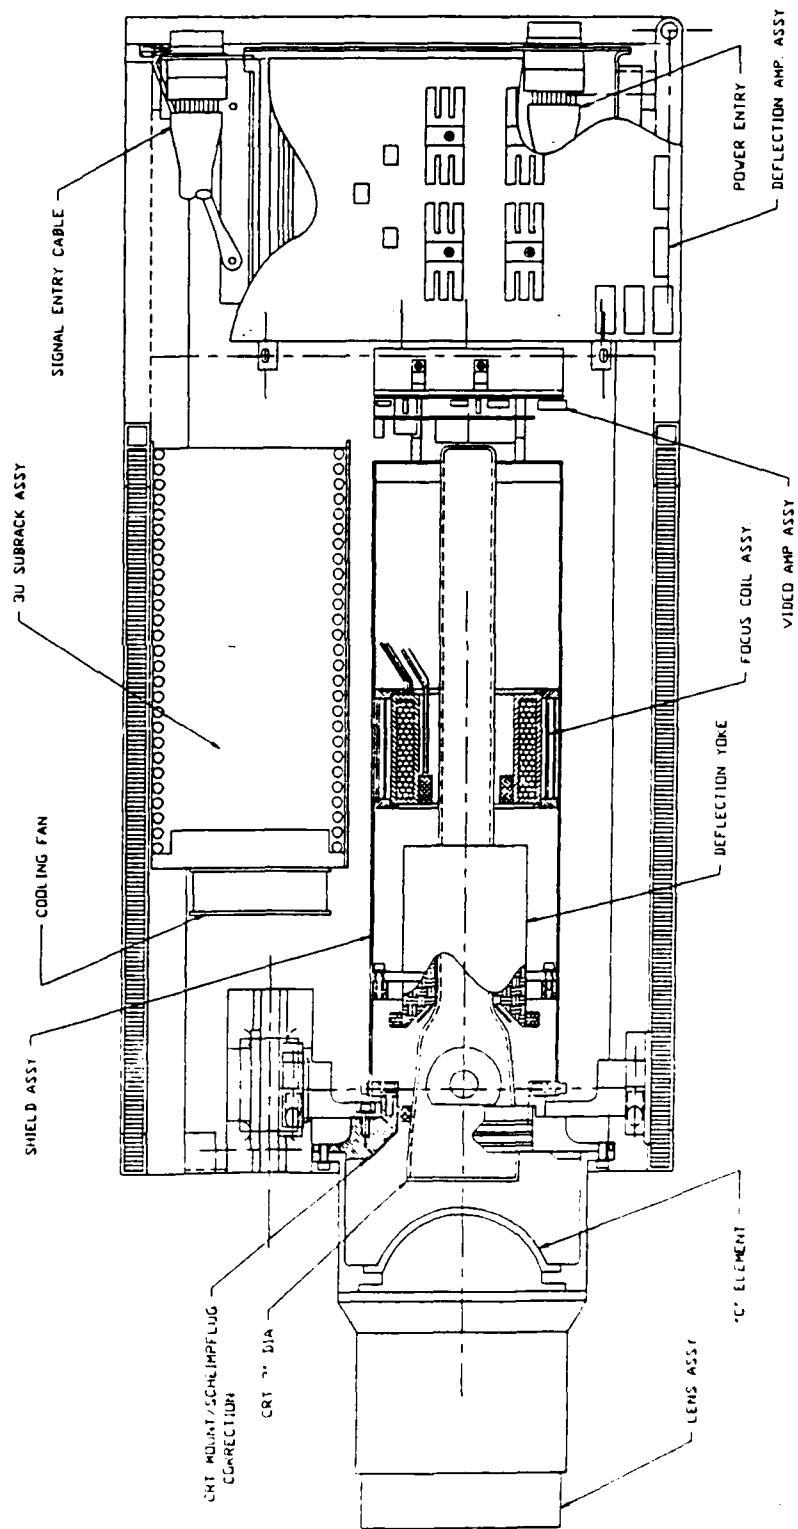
Head Assembly 4" Single Crystal Faceplate Based CRTs
